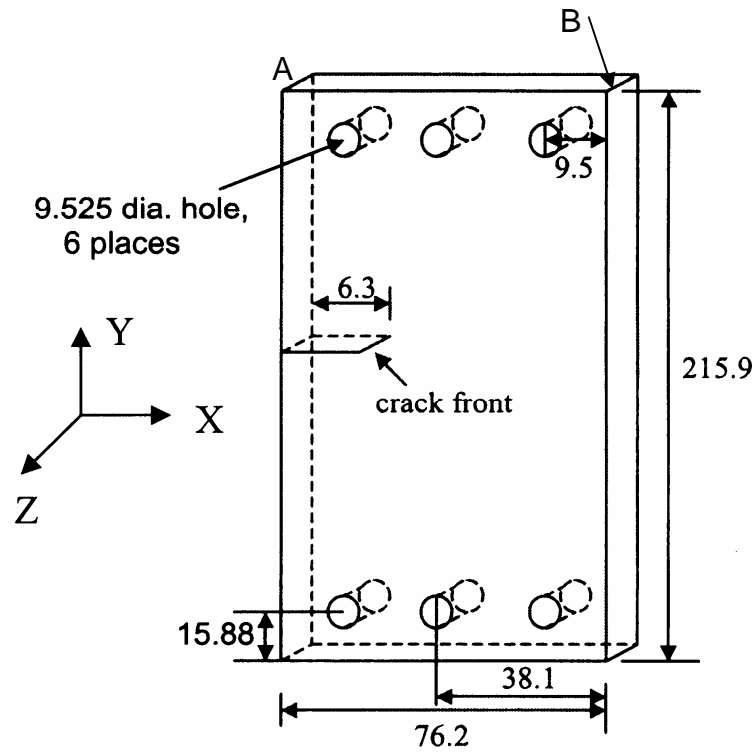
Schematic of a single-edge crack test specimen (all dimensions in mm).
